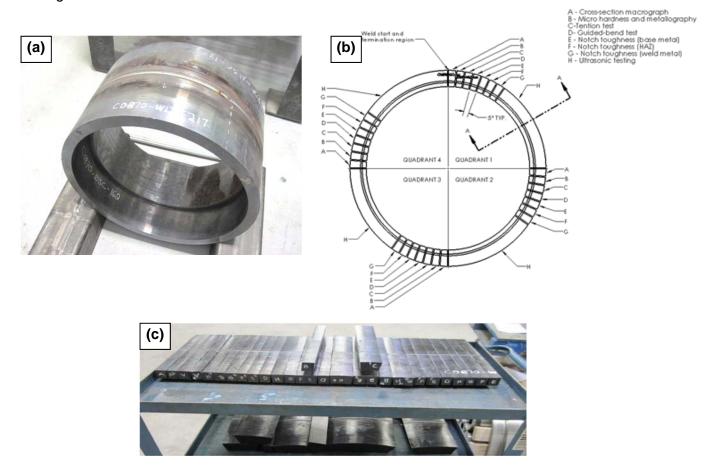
(a) UFC Closure Weld Mock-up Assembly Simulating Shell-to-Head Geometry for WPS/PQR Testing, (b) Sampling Locations and (c) Coupons for Mechanical/metallurgical Tests
